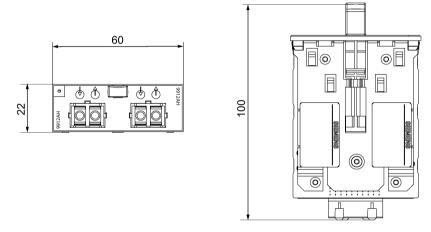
MM900 dimension drawing 7: SC RJ ports optical
